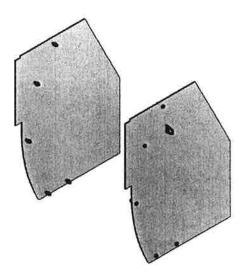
; #1382188, SIDE END PLATES, PAIR, BLADE 60
